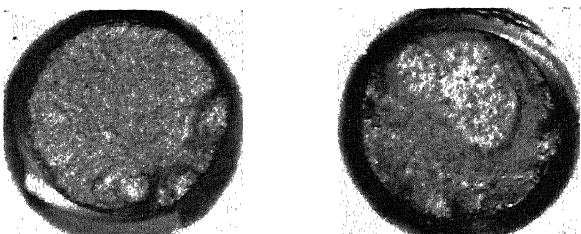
TEST-BAR FRACTURES FROM TREATED FORGING 948C. $\times 2$.
